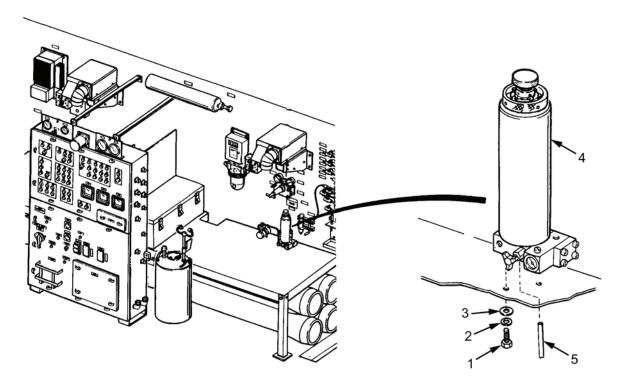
Outlet Air Filter (Sheet 1 of 2).
